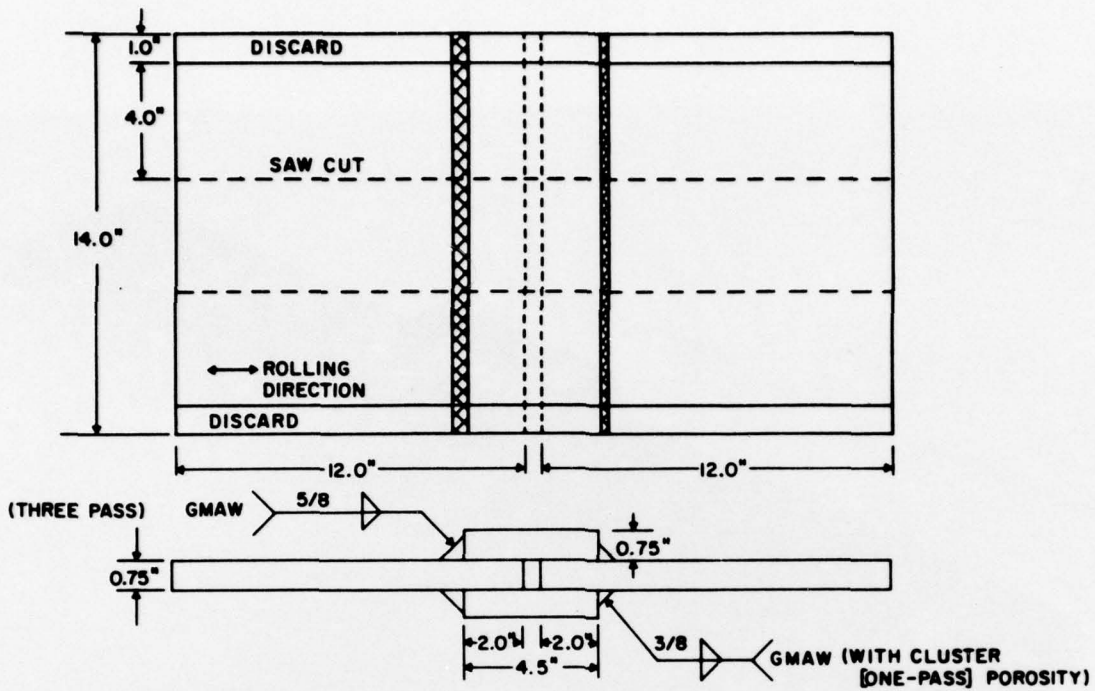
Dimensions of fillet weld specimen blanks and individual specimens after saw cutting. SI conversion factor: 1 in. = 2.54 cm.
